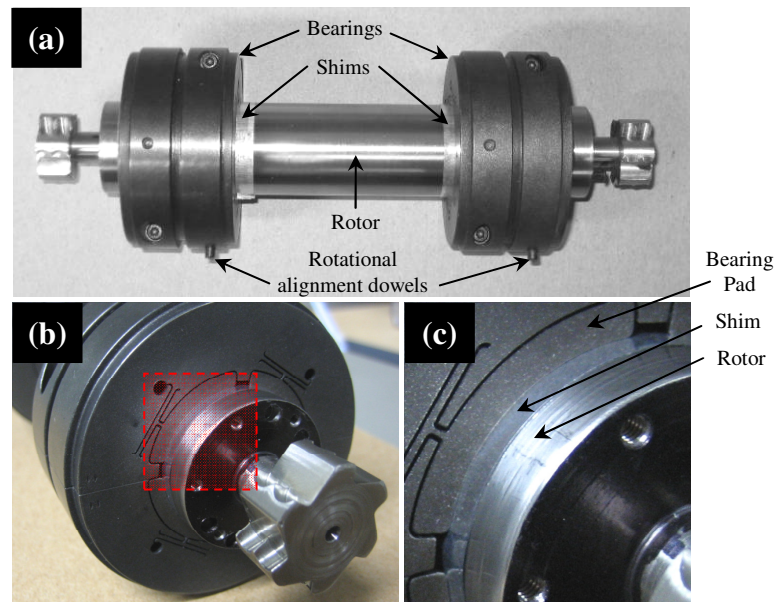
Rotor-bearing relative alignment – (a) rotor wrapped with shims within bearings to consume set bore clearance; (b) end view of aligned bearing at “Front” of rotor; (c) magnification of end view showing the shim between the rotor and the bearing pad.
